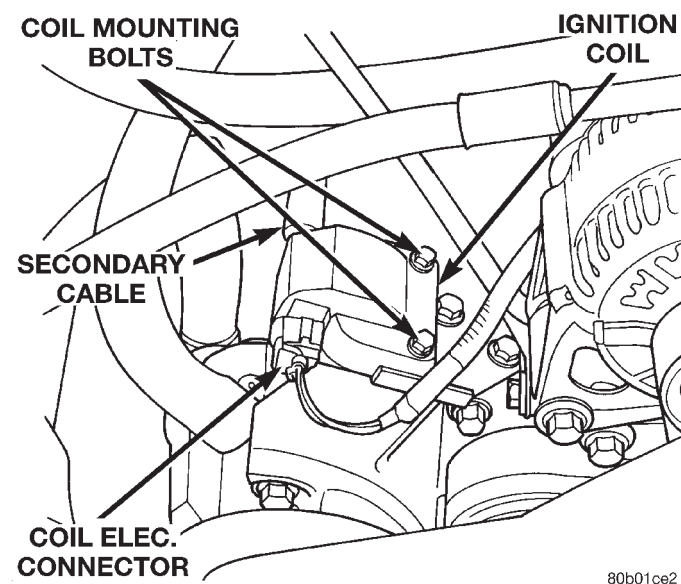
Ignition Coil—5.9L V-8 HDC-Gas Engine
